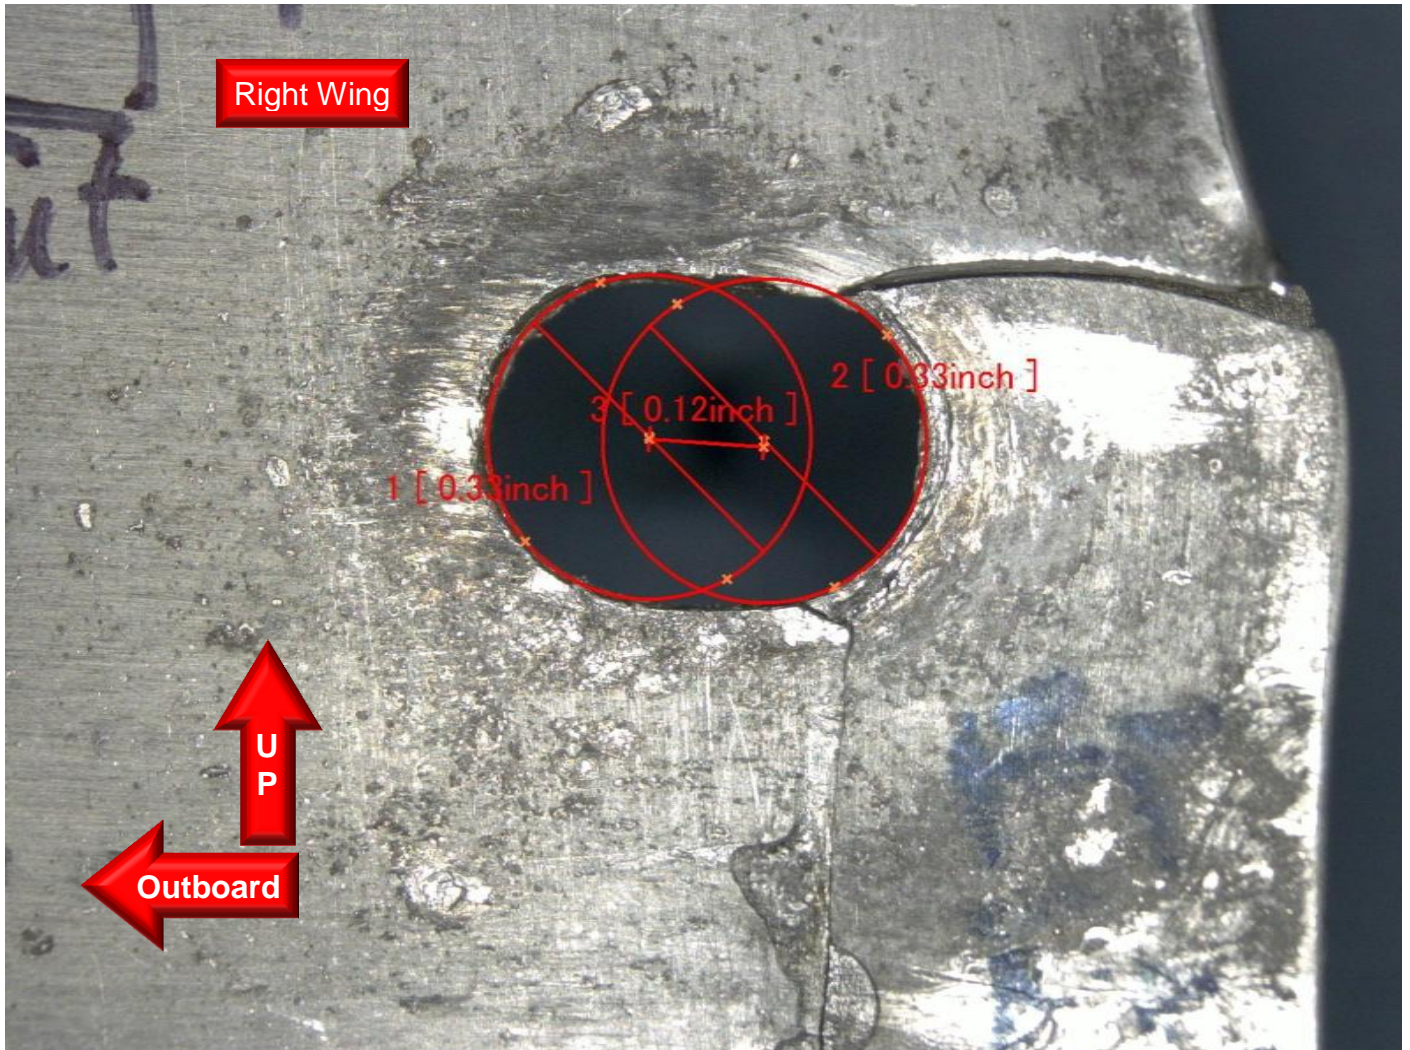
Closer view of the right wing fork attachment hole with the separated piece in its original position showing the inboard elongation of the hole.
